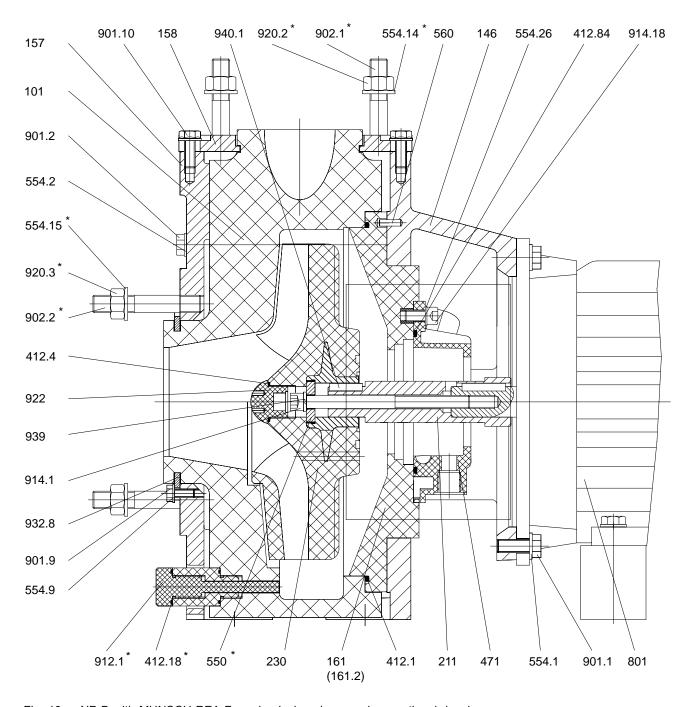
NP-B with MUNSCH-REA-F mechanical seal – overview sectional drawing
